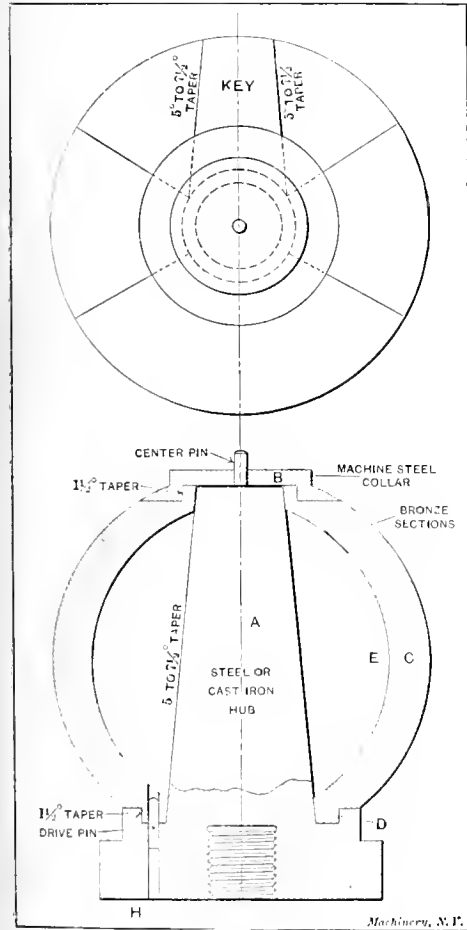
Elevation and Plan showing Construction of Sectional Chuck
